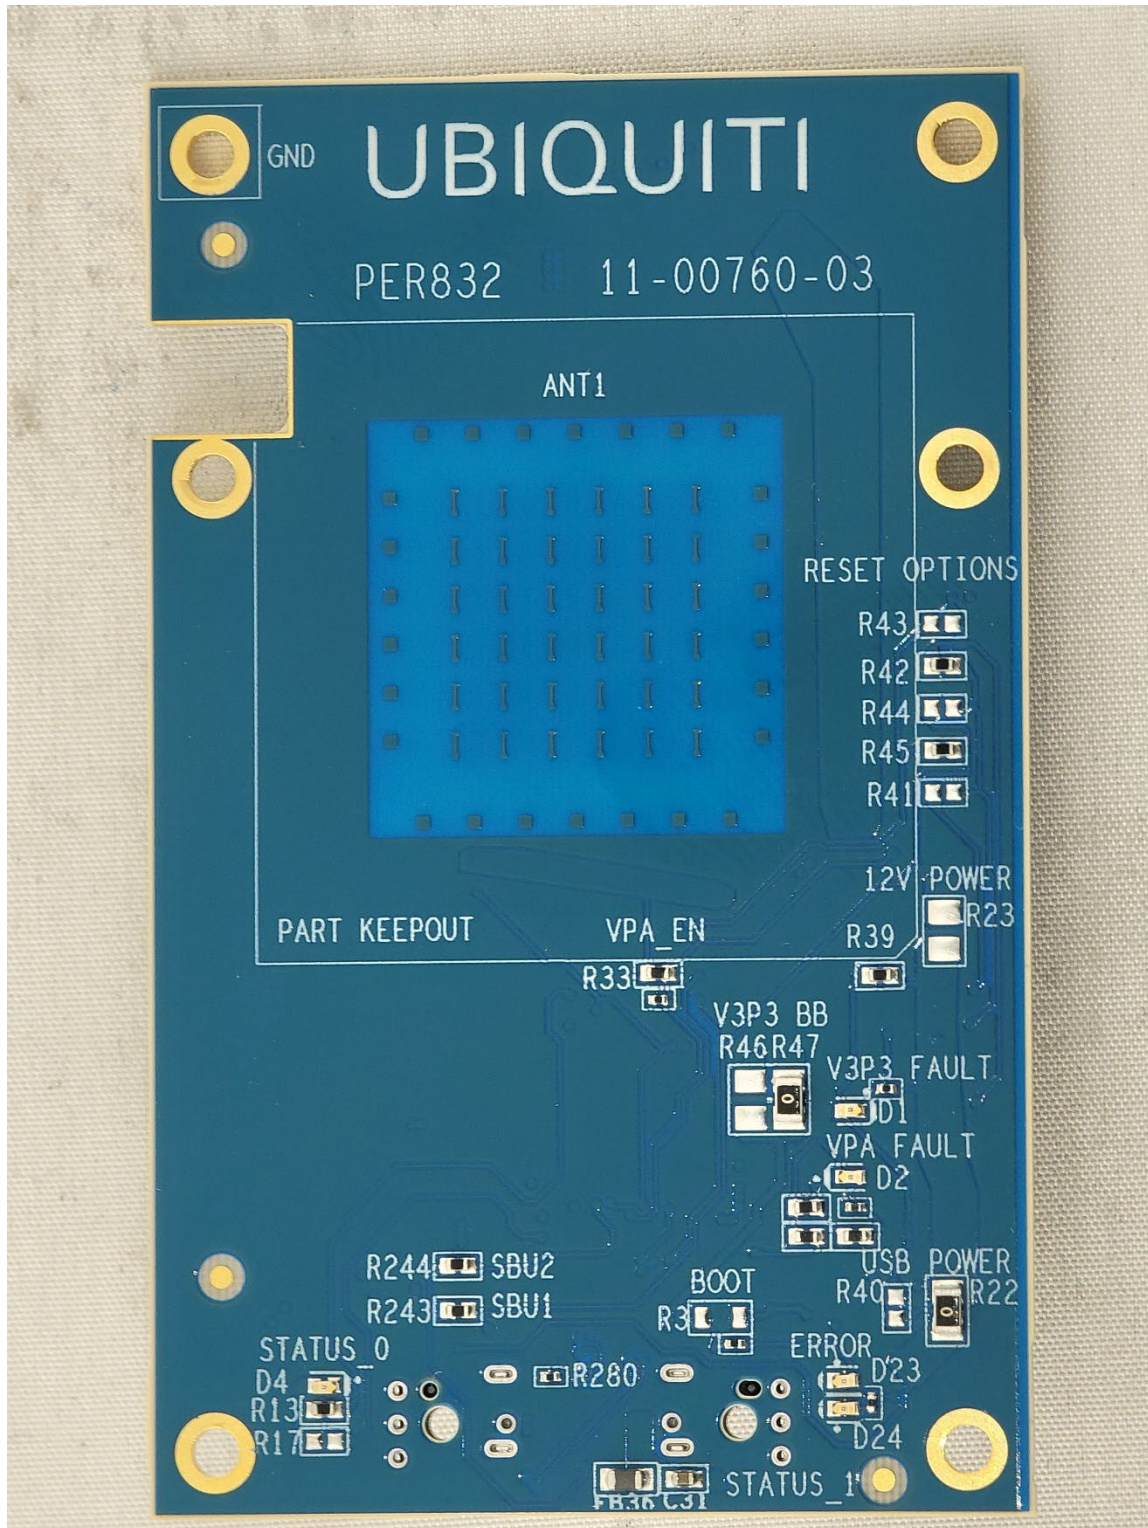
Back View of Main Printed Circuit Board EMI Can removed
